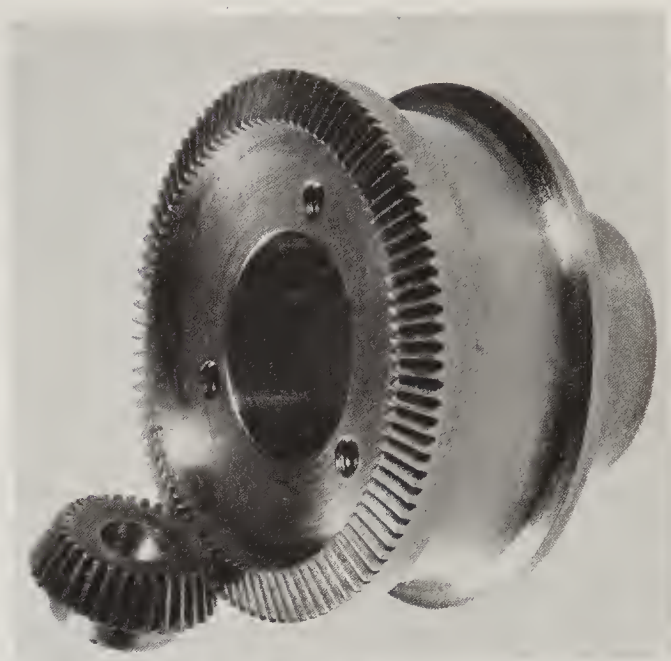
Bevel gears. (Western Gear Corp.)
